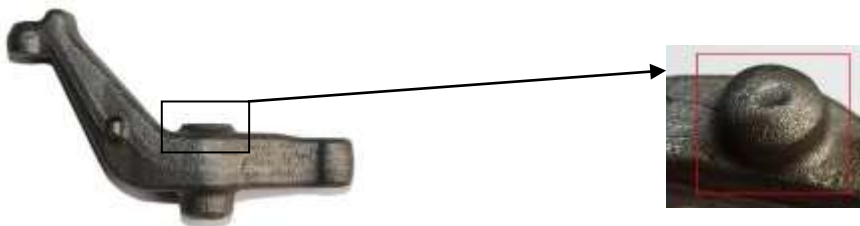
Defects in lever forging: Underfill in lever forging.
